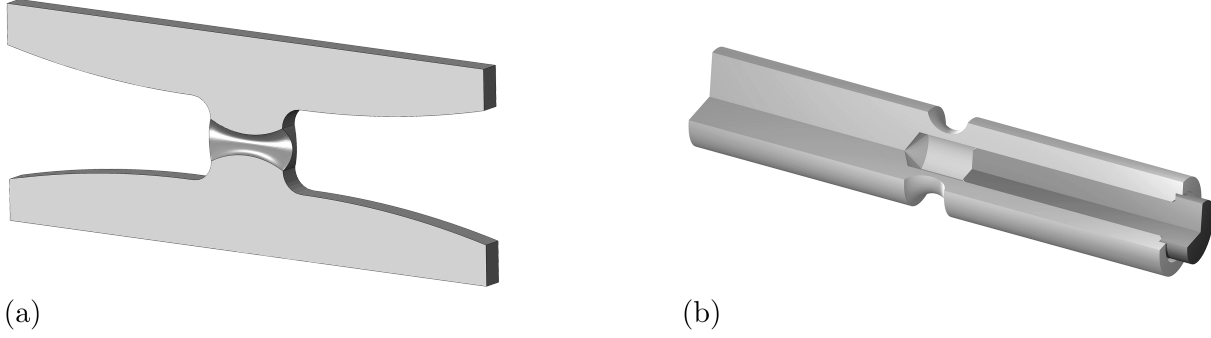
Specimen having geometry of a: (a) butterfly; (b) notched tube [242].
